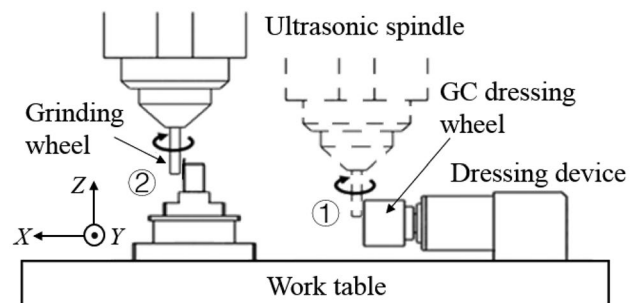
Photograph of the experimental apparatus constructed for ultrasonic-assisted truing/dressing of the diamond grinding wheel with a cup-shaped GC wheel
